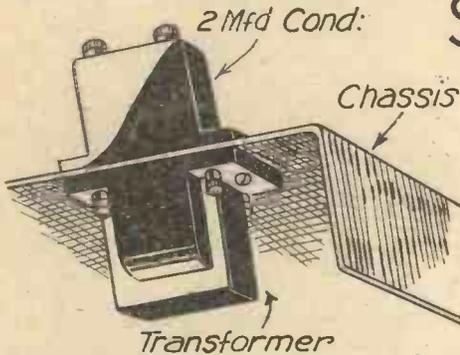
Simplification of mounting components by standardized spacing of fixing holes.
